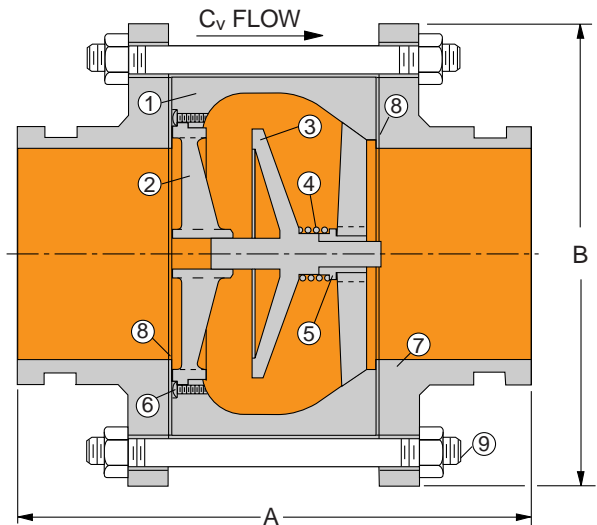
G GROOVED-END SILENT CHECK VALVE
